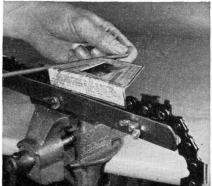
A special clamping fixture for sharpening "chipper" type saw chains. Notice the file guide.
